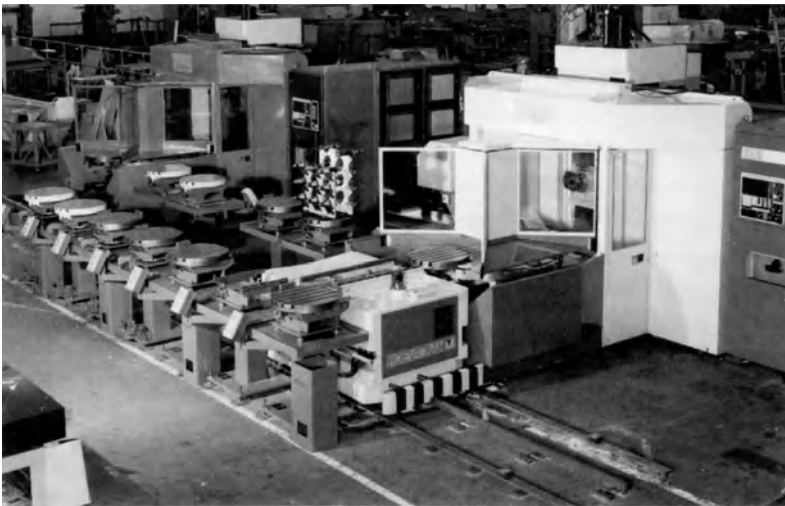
A rail-guided vehicle (RGV) automatically delivering palletised workpieces and cutting tools to two horizontal machining centres in an FMC under test. [Courtesy of FMT.]
